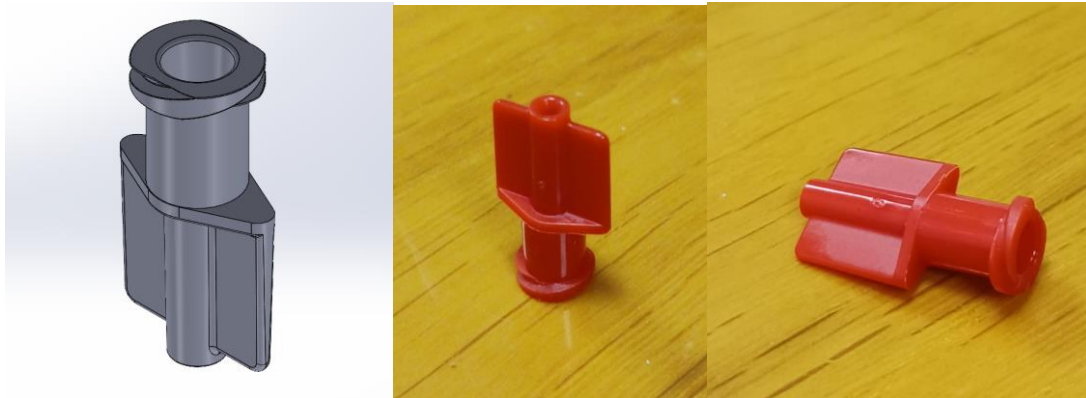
Component 49 of mold 712, (a) definition drawing, (b) and (c) real component, courtesy Muroplás.
